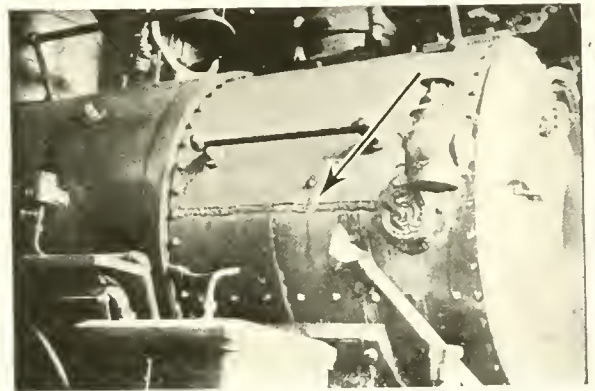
Arc Welding as used in making smoke box for locomotive boiler.
